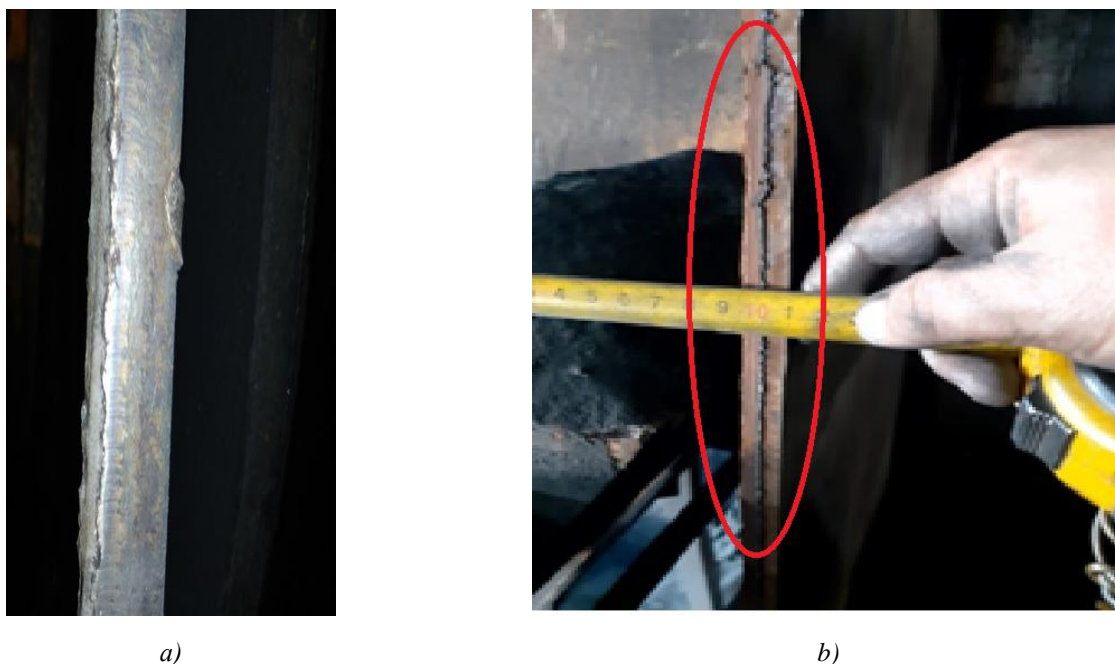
The destroyed welded joint of the side wall of the end beam with the flange of the undercarriage wheel module (photo by the authors): a — penetration depth of the destroyed weld is close to zero; b — wall of the end beam with the destroyed weld
